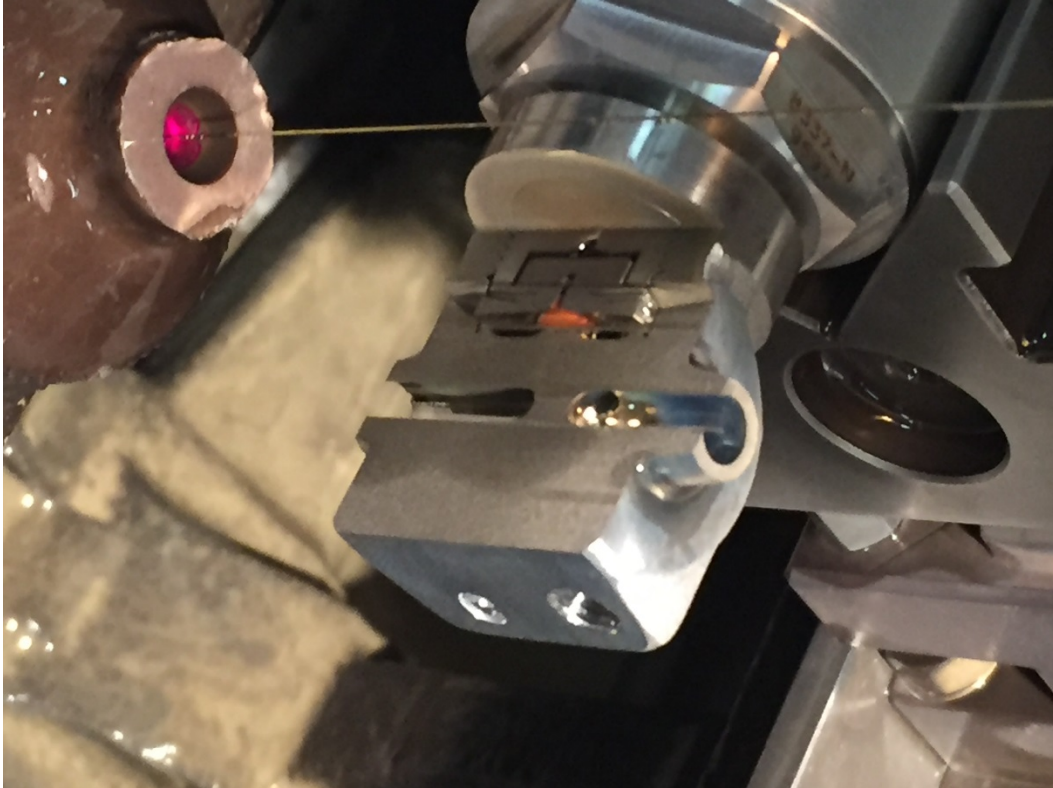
Ham-Let Valve in EDM Machine [10]
